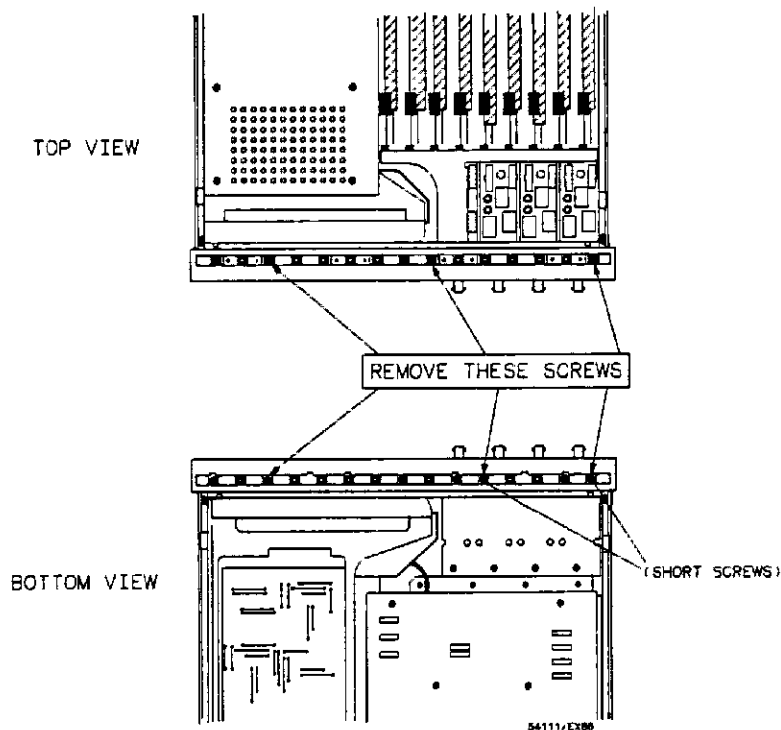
A-1. Top and Bottom Front Panel Mounting Screws.
